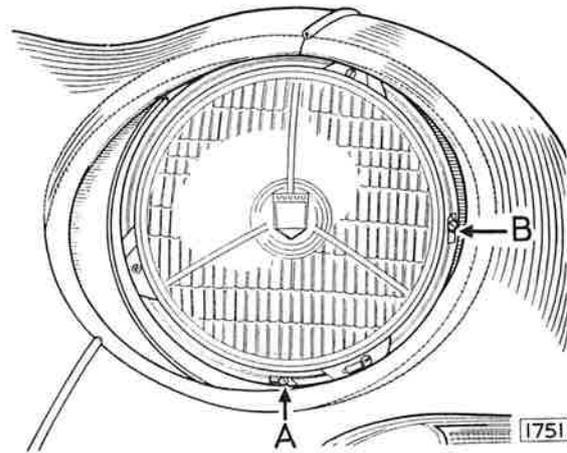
Adjustment of the screw 'A' will alter the headlamp beam in the vertical plane; adjustment of the screw 'B' will alter the beam in the horizontal plane.
